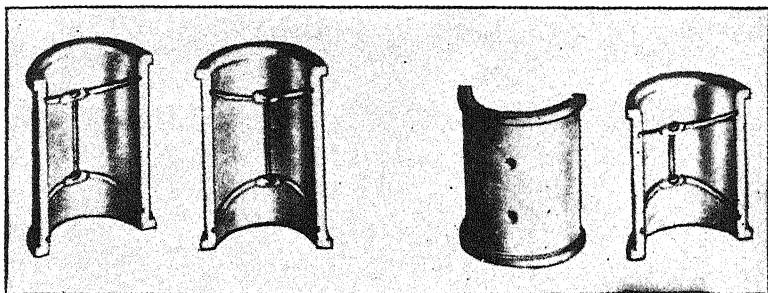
Bronze-backed babbitt liners for crank-shaft and connecting-rod bearings.
